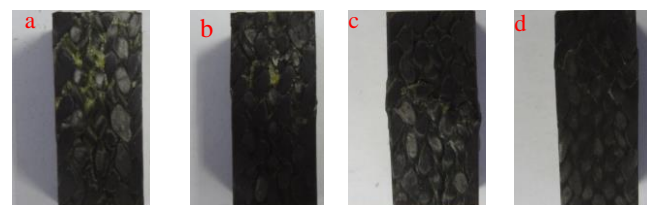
The fracture photographs of compression specimen at 150°C with different heating time (a) 150°C 15min; (b) 150°C 600min; (c) 150°C 1800min; (d) 150°C 3000min.
